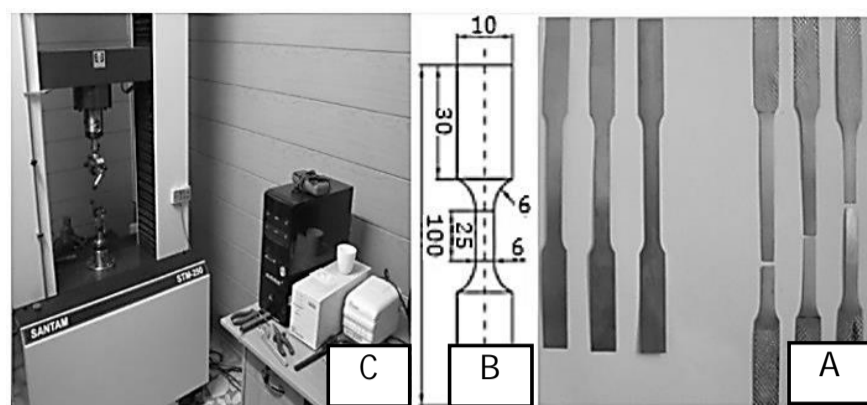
Tensile test of sheet steel plate austenitic 316, A) Before and after tensile test, B) size of the sample, C) tensile testing machine
